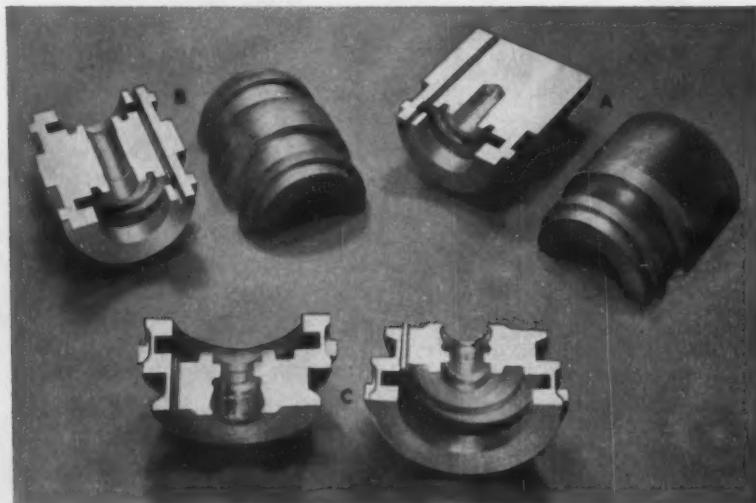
Examples of the slugging technique used in making glass-mold neck rings. Double-length slug pair (A) is reversed in the chuck and machined as at (B), and sliced into pairs as at (C).
